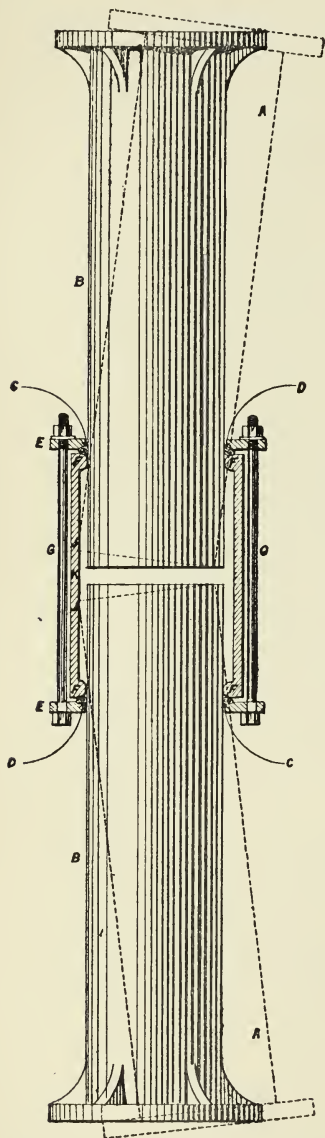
STEAM PIPE EXPANSION JOINT FOR UNDERGROUND ROADWAYS.
